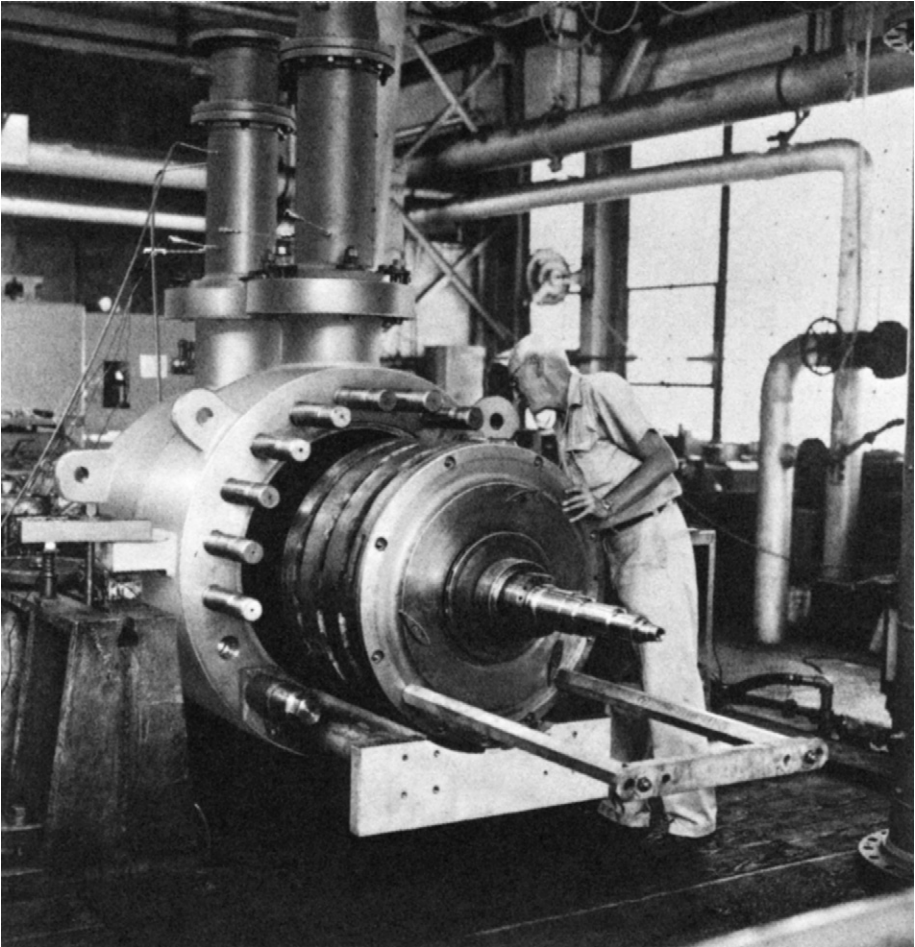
Barrel-type compressor (courtesy Elliott Company, Jeannette, PA).
